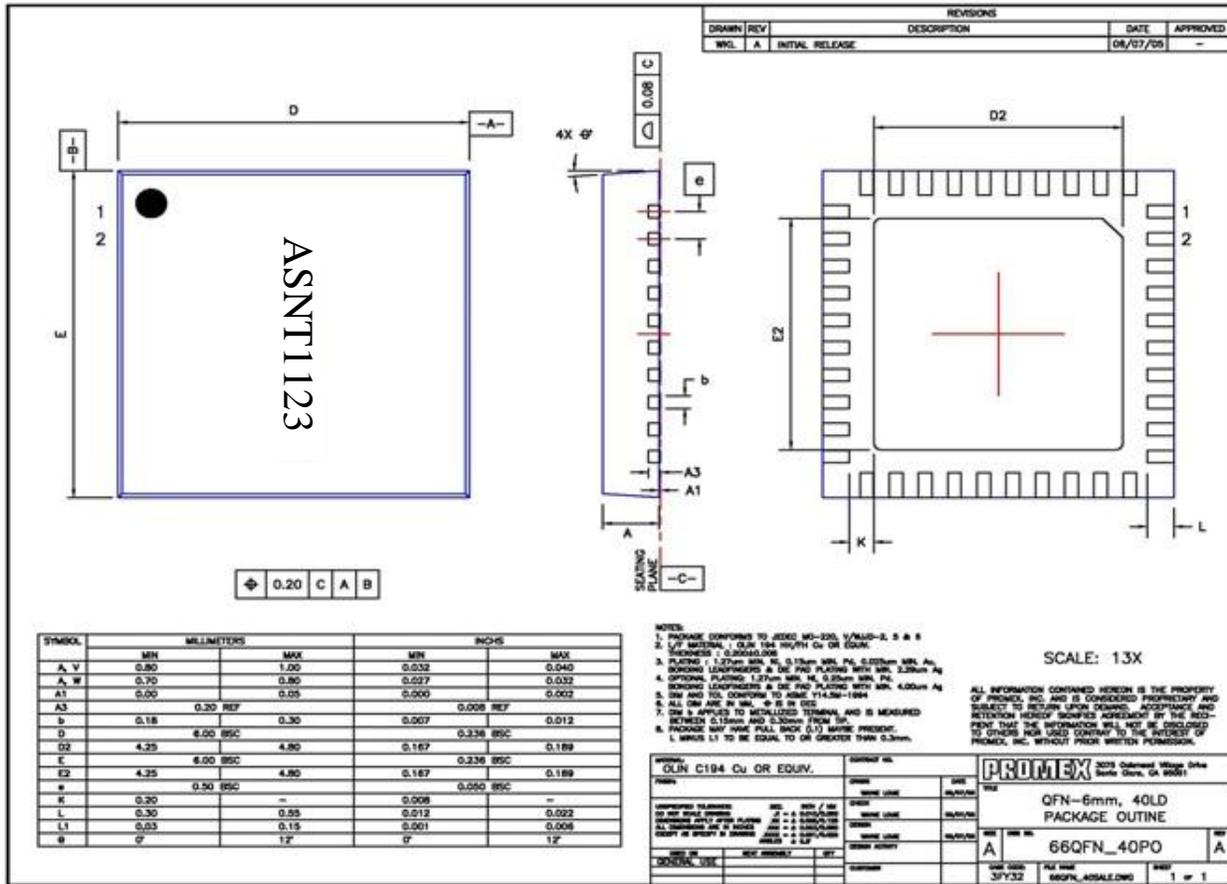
QFN 40-Pin Package Drawing (All Dimensions in mm)
